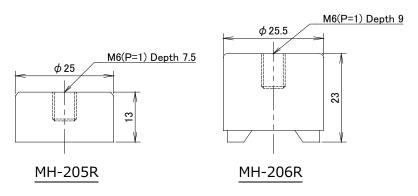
Outer Dimensions of Magnet (Unit: mm)
